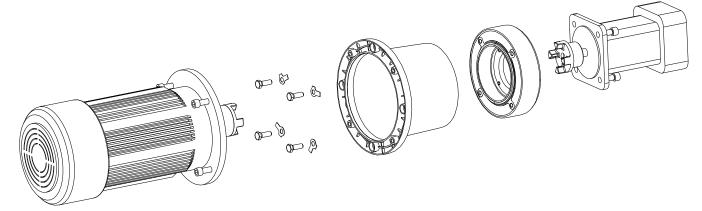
Combination of bellhousing - damping ring with electric motor and pump
